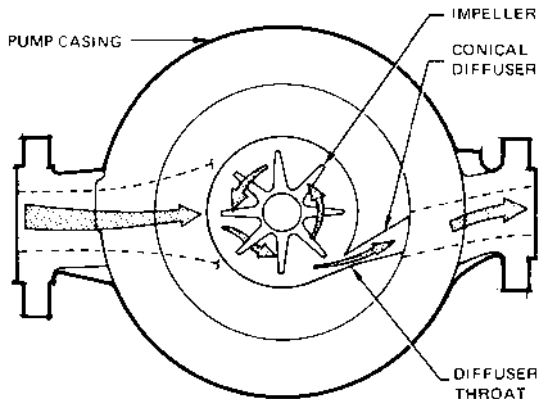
A straight-radial-vane impeller in a single emission-point, conical-diffuser circular casing (Sundyne Corporation)
